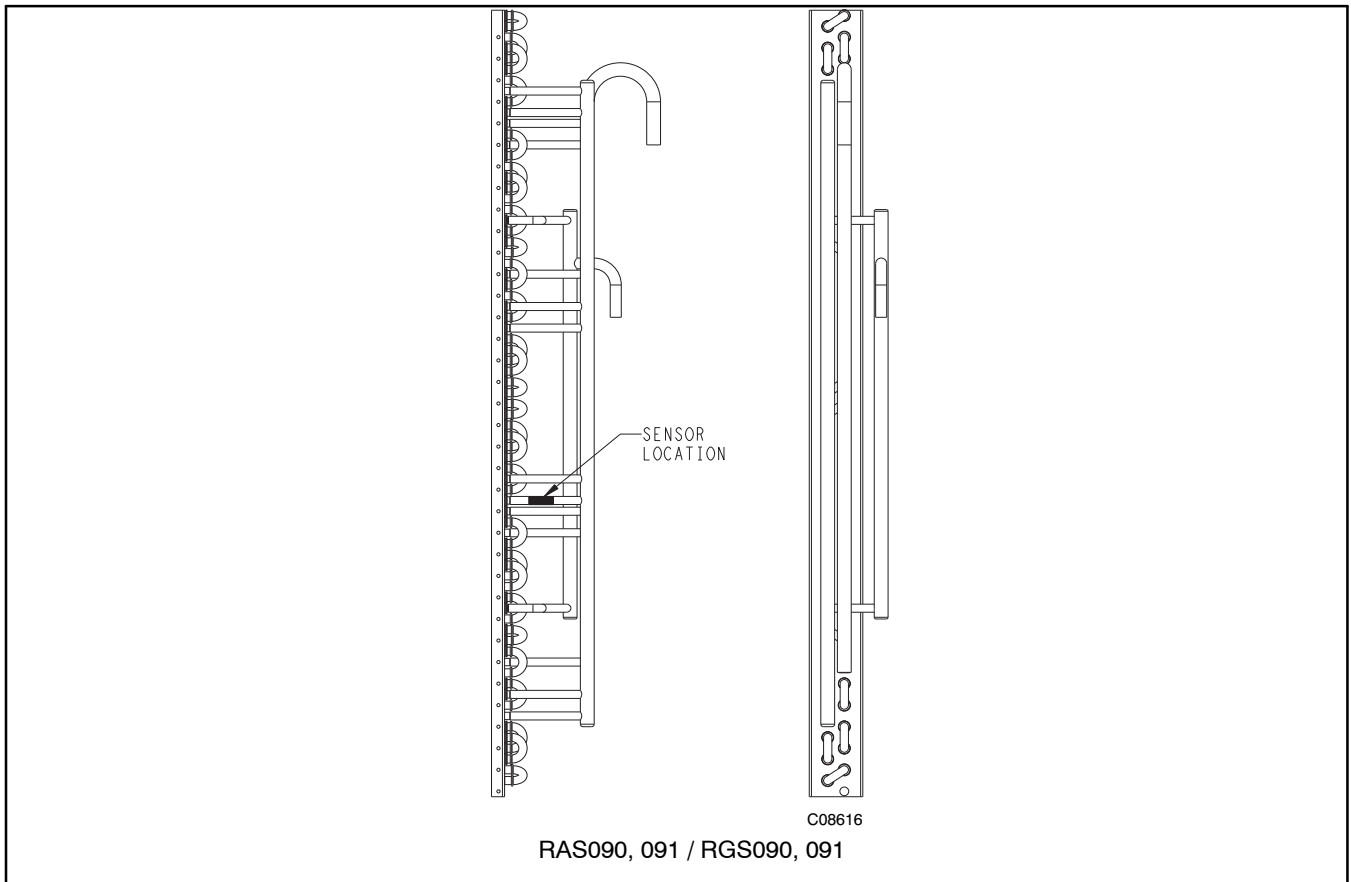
Motormaster® II Sensor Locations – 7-1/2 Ton Cooling Units
